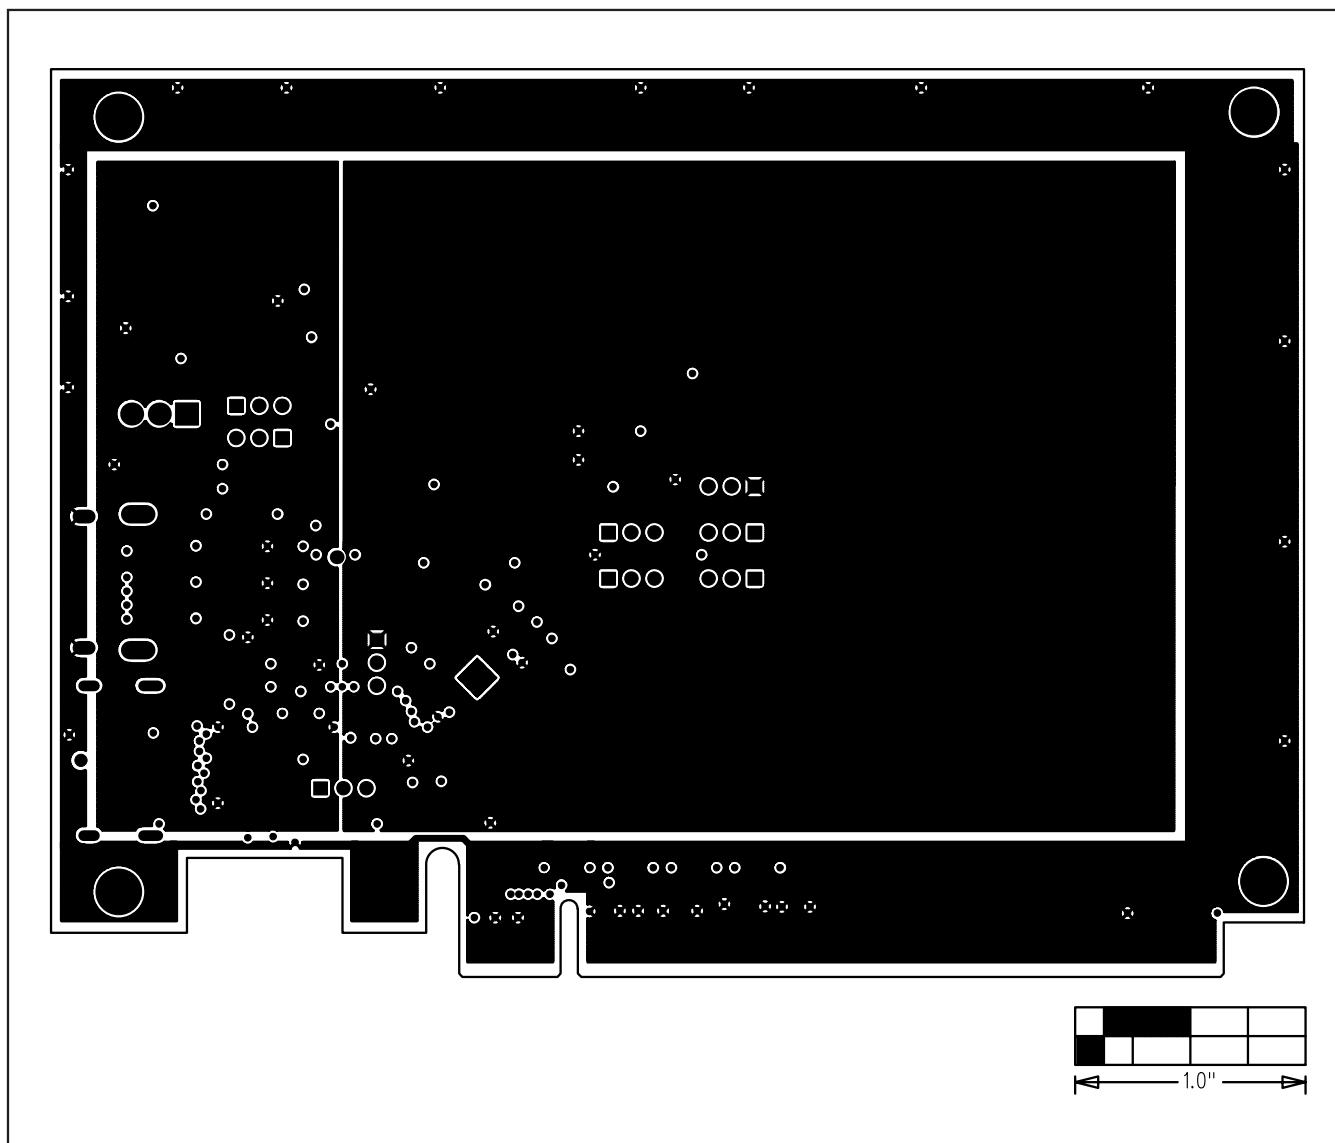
MAX9406 EV Kit PCB Layout—Power Layer 3
